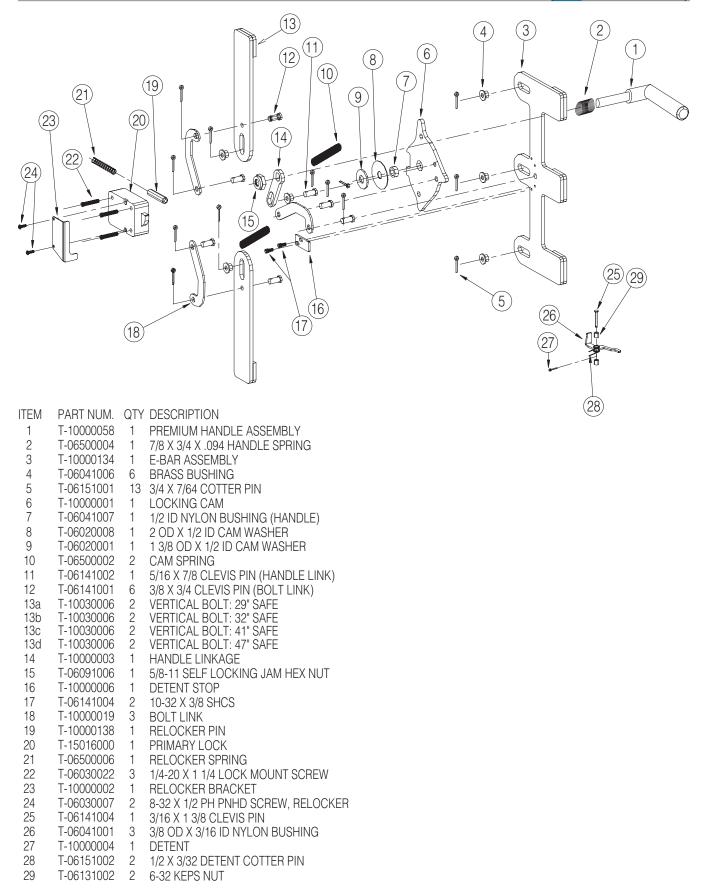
BSM/BSD (AX) Door Hardware Exploded View
